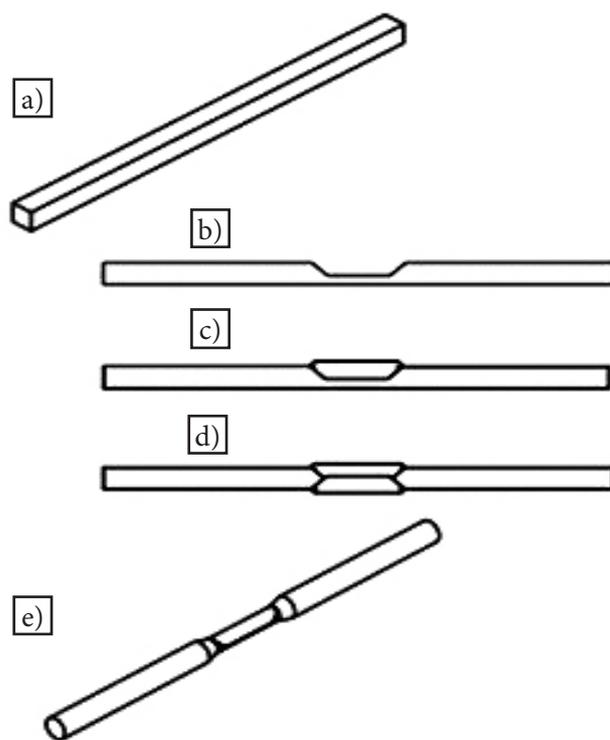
Stages of the preparation of specimens used in the elongation of the weld in the static tensile test: cutting out the material (a), milling of the seat and the position of weld no. 1 (b, c), milling of the seat and the position of weld no. 2 (d), turning of the specimen (e)
